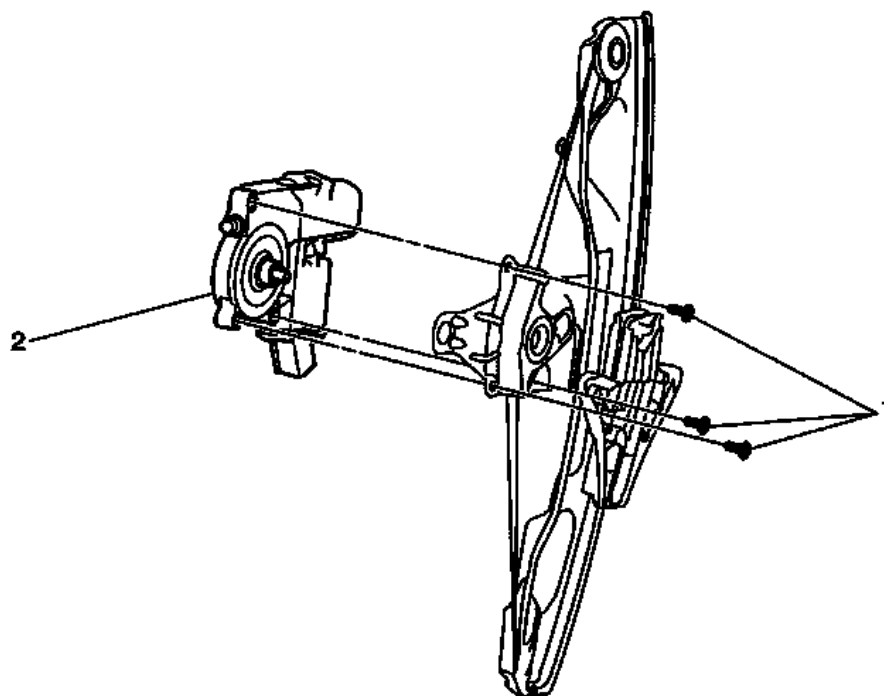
View Of Rear Side Door Window Regulator Motor & Bolts
